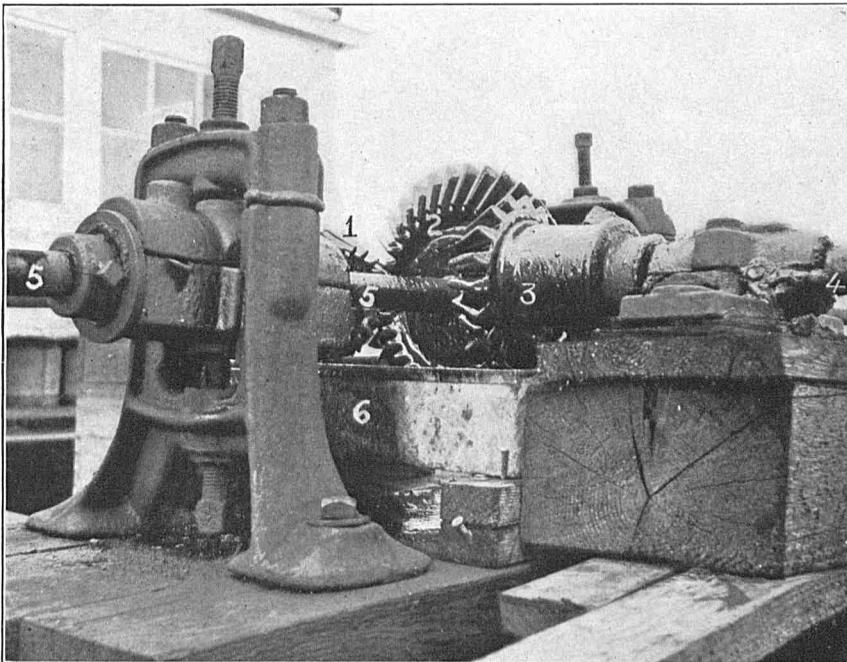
Detail of gears on float at junction of transverse and longitudinal shafts. (Compare fig. 4, pl. xci.) 1, gear on horizontal shaft from house boat; 2, large gear on longitudinal shaft, reducing speed one-half; 3, gear on the inner end of transverse shaft (4); 4, shaft transmitting power to outer float; 5, longitudinal shaft on inner float; 6, oil box.
